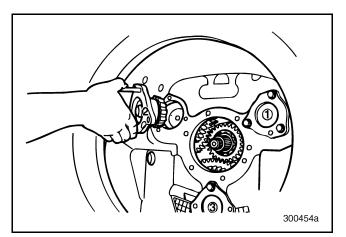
No. 2 Front Countershaft Front Bearing Cover Removed
